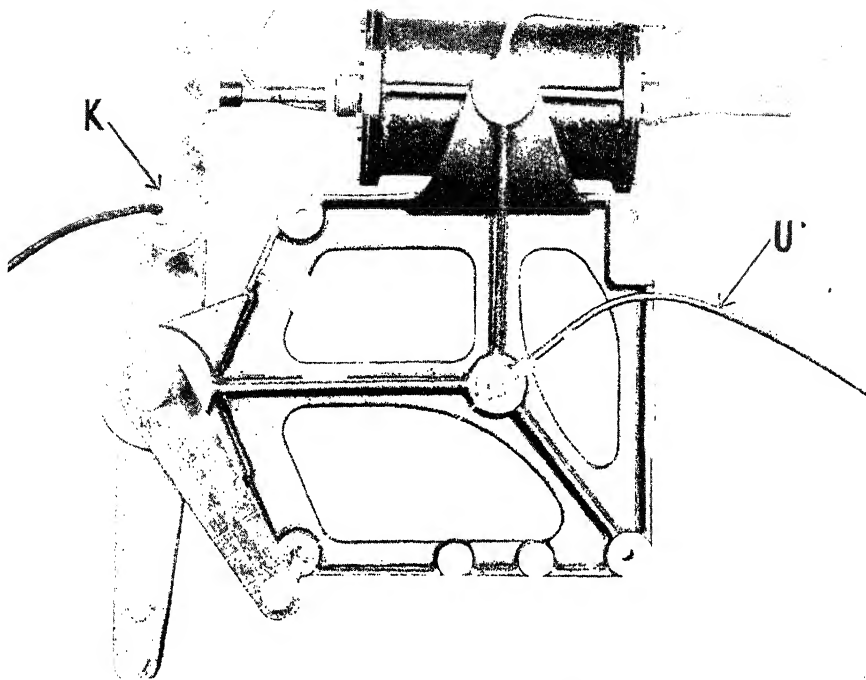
ELEVATOR SERVO-MOTOR AND MOUNTING.
